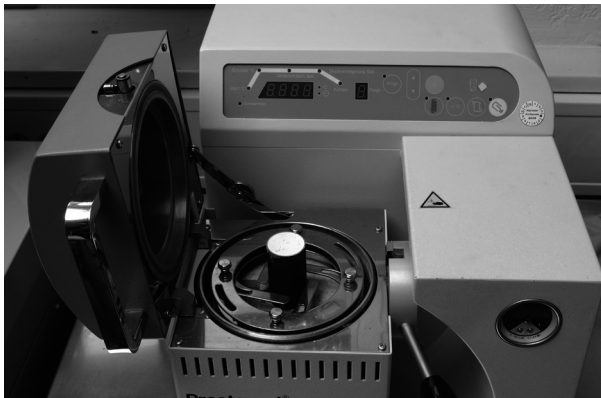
Vacuum pressure casting machine Prestomat® by Degussa Dental GmbH
